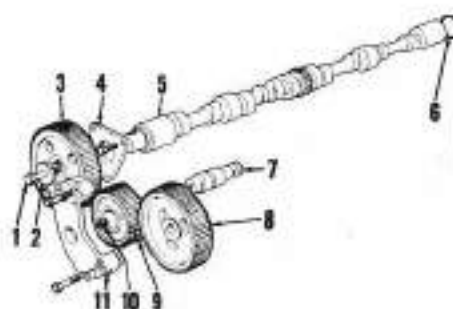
Exploded view of model 1200 camshaft, idler gear and fuel injection pump drive gear. Model 990 with 4/49 engine is similar except that fuel injection pump drive gear is retained with three cap screws and dowel pin instead of nut and Woodruff key.
